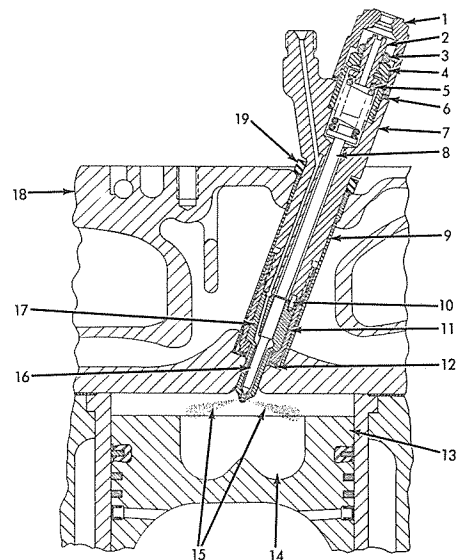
Fuel Injection Nozzle-Holder — Installed (T-35178)
